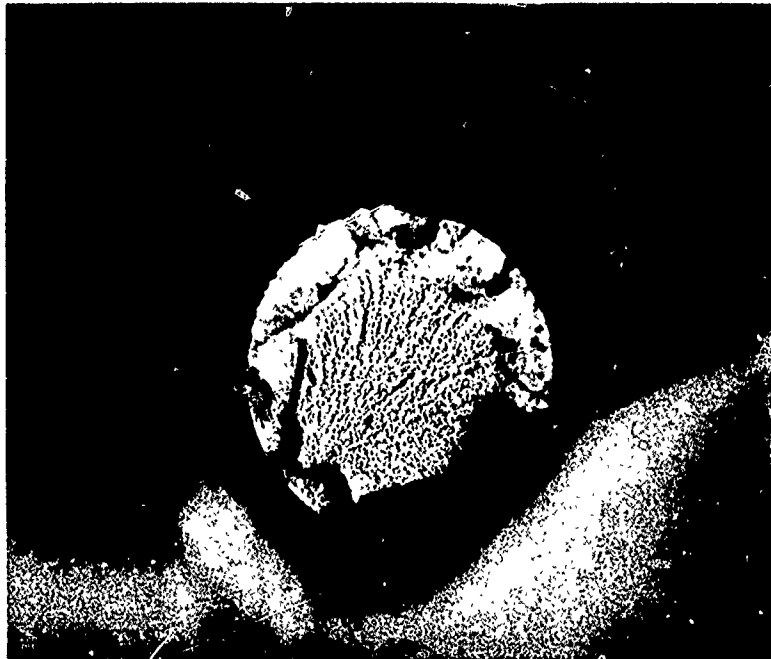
Fracture Surface of Ti-Cad Specimen No. 1.
